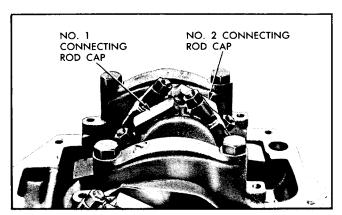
Crankshaft Positioned for Removal of No. 1 and 2 Connecting Rod Caps
